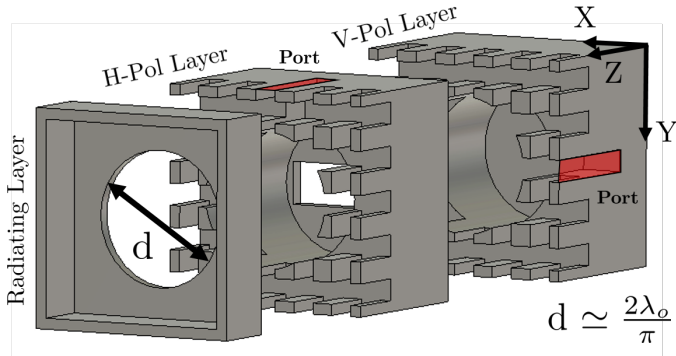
Perspective exploded view of the stacked configuration of the radiating element.
